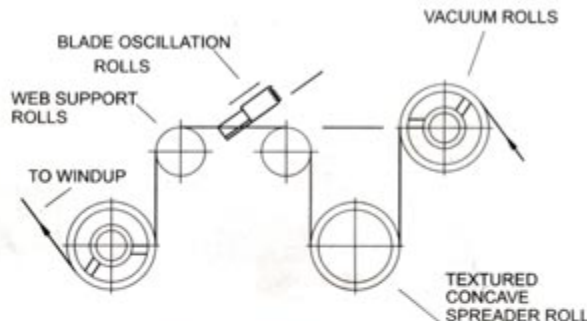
While slitting, web tension must be balanced on both side of the slitting blade.
